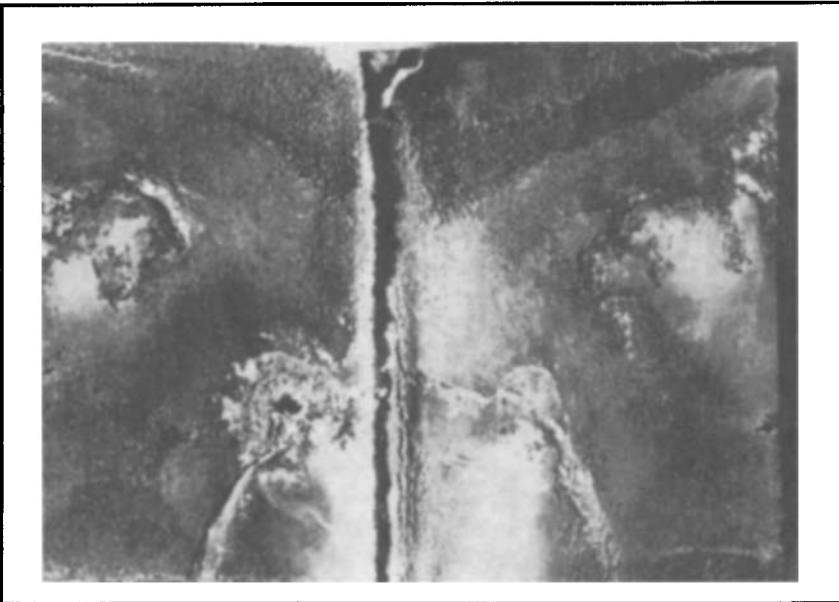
Failure of a 6951 alloy automotive radiator tube by erosion corrosion channeling. (Ref 135)
